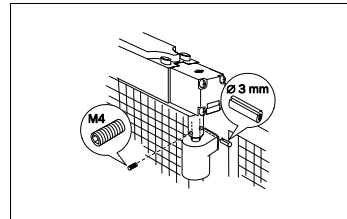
Ensuring a positive fit between switching shaft and hinge
